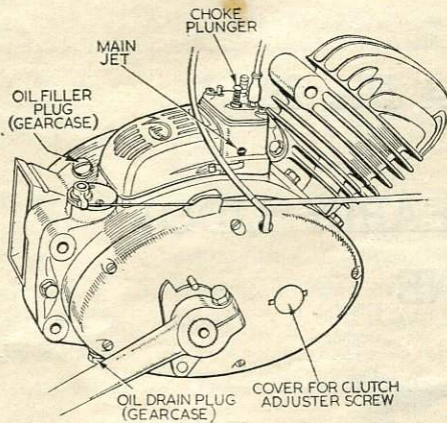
Power-unit engine details, showing gearcase oil-drain plug.
